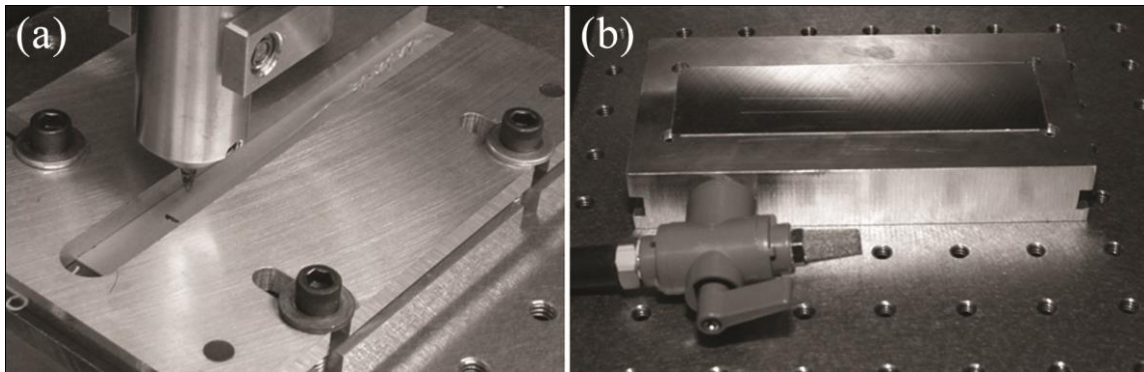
(a) Clamp fixture and (b) vacuum fixture
